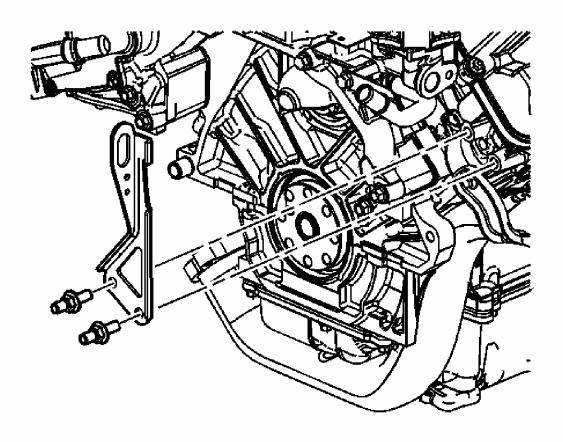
Identifying Engine Rear Lift Bracket Courtesy of GENERAL MOTORS CORP.
